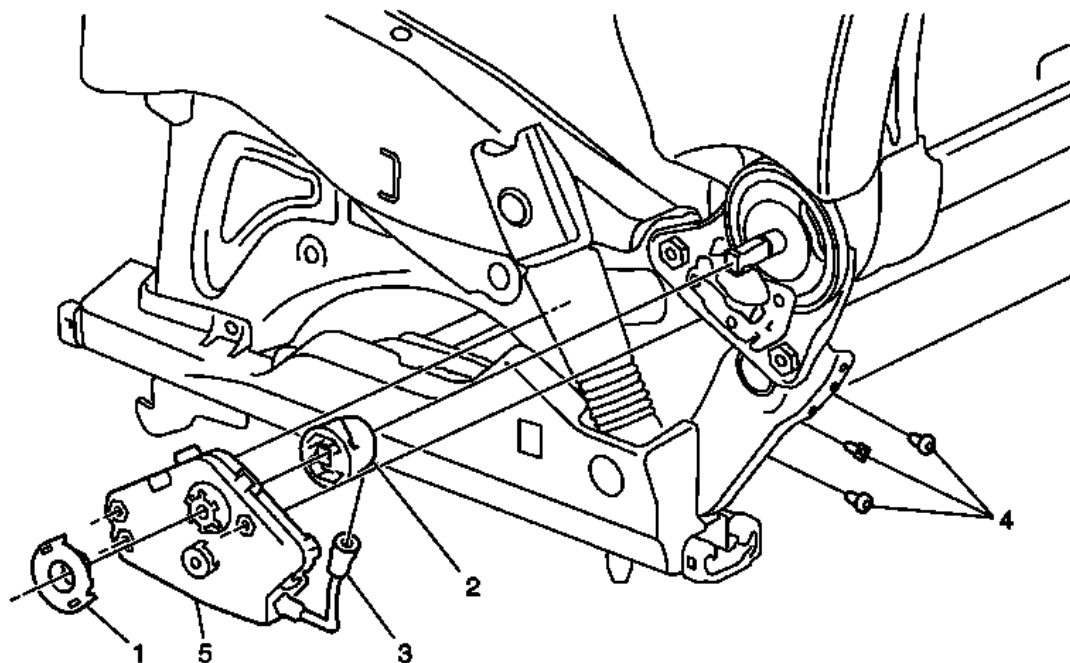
Front Seat Recliner Control Components (Driver Or Passenger Seat)
